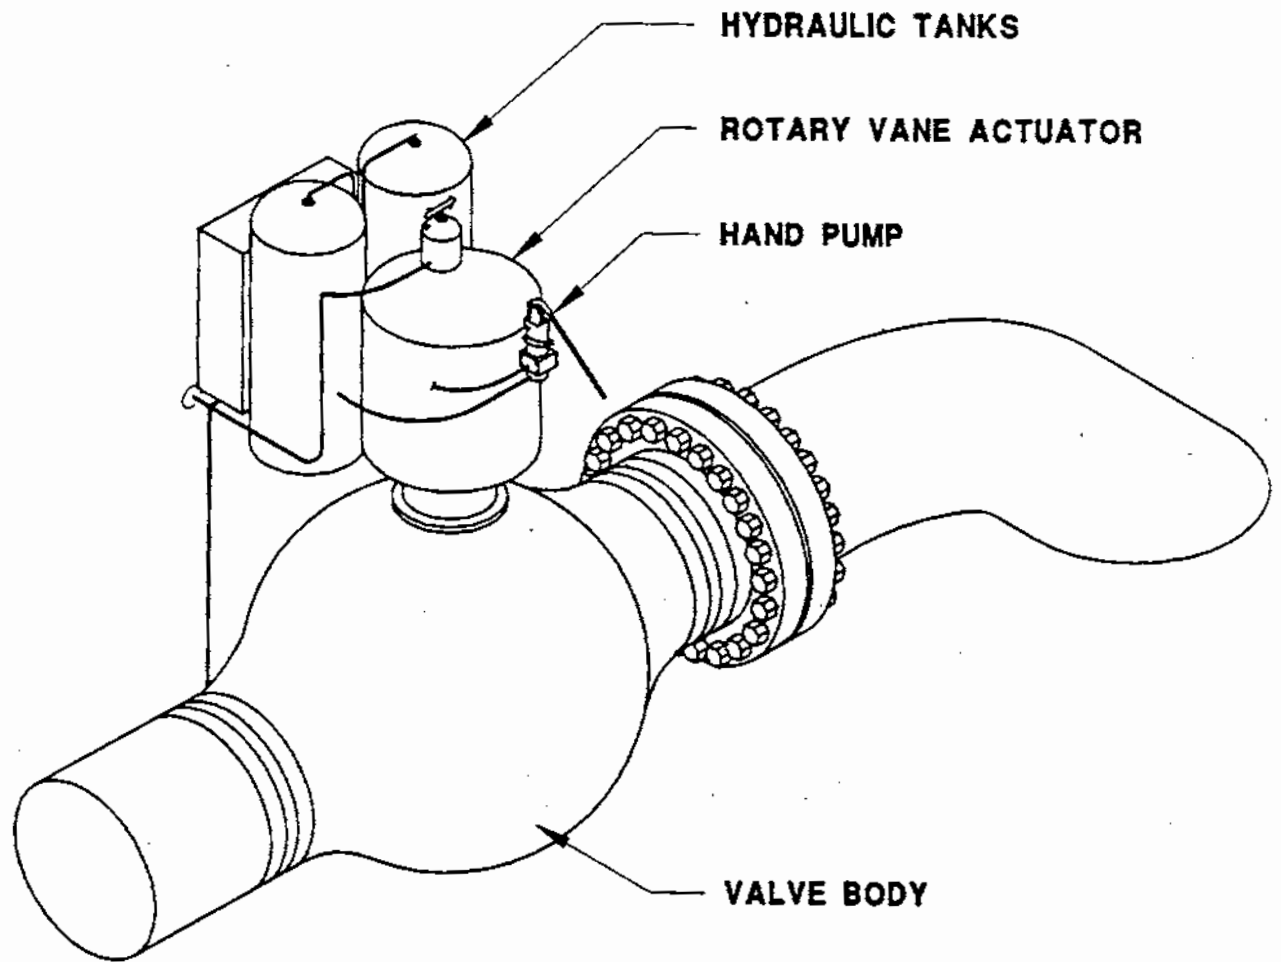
Pneumatic/Hydraulic Rotary Vane Operator¹²
